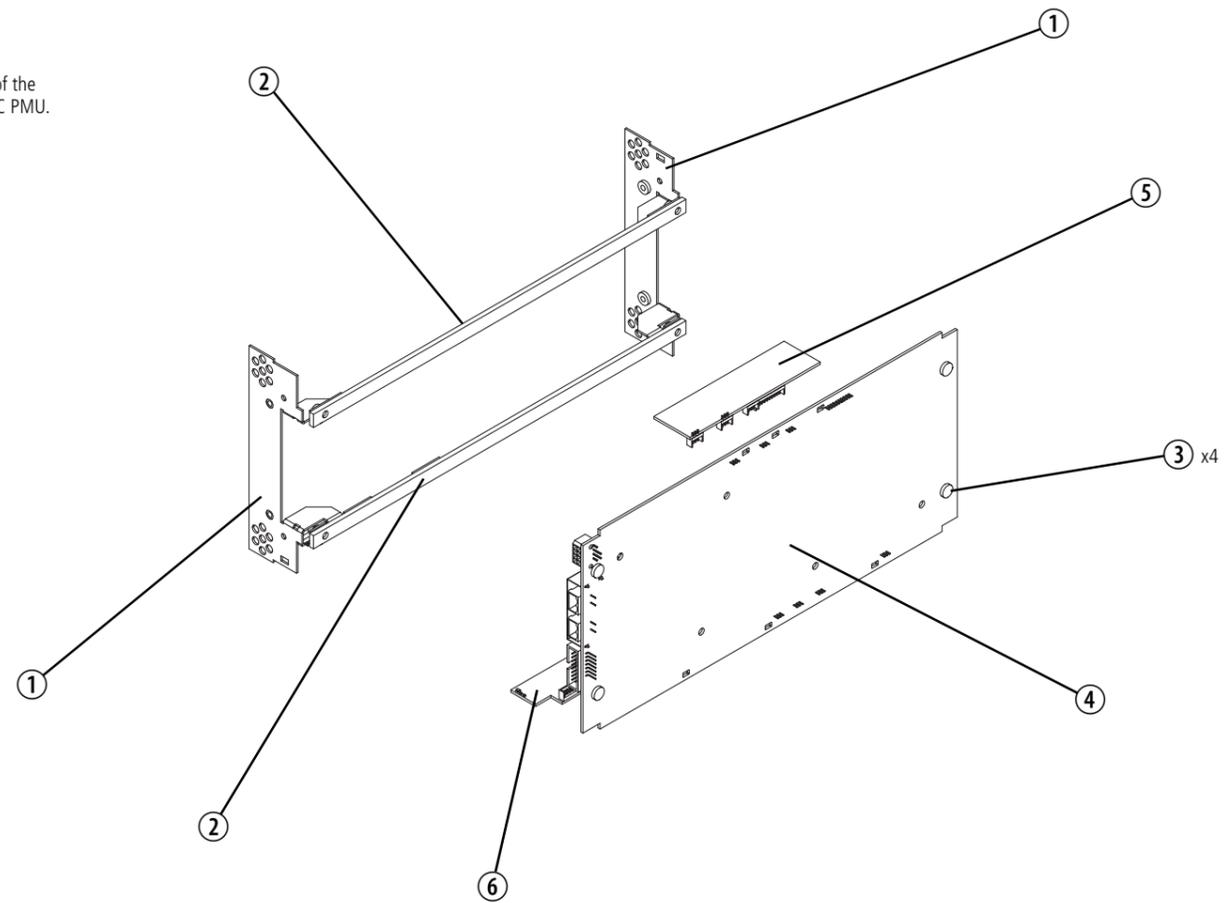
PMU Mechanical Assembly - Sheet 2
